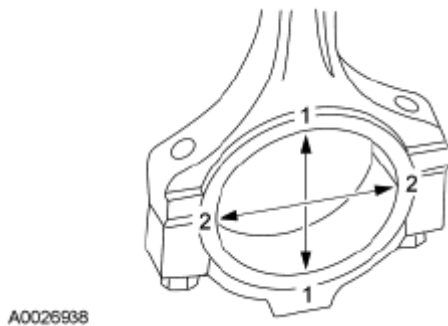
Measuring Connecting Rod Large End Bore In Two Directions
